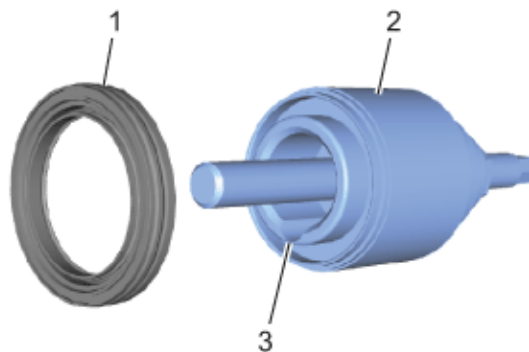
Crankshaft Front Oil Seal And Installer Tool (First Design)
